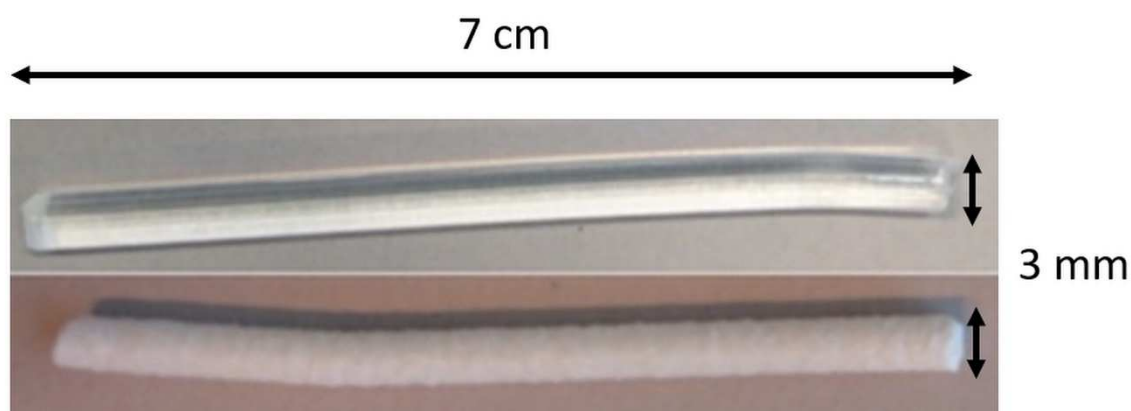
PLA rod (up) and composite rod (down) obtained after extrusion
